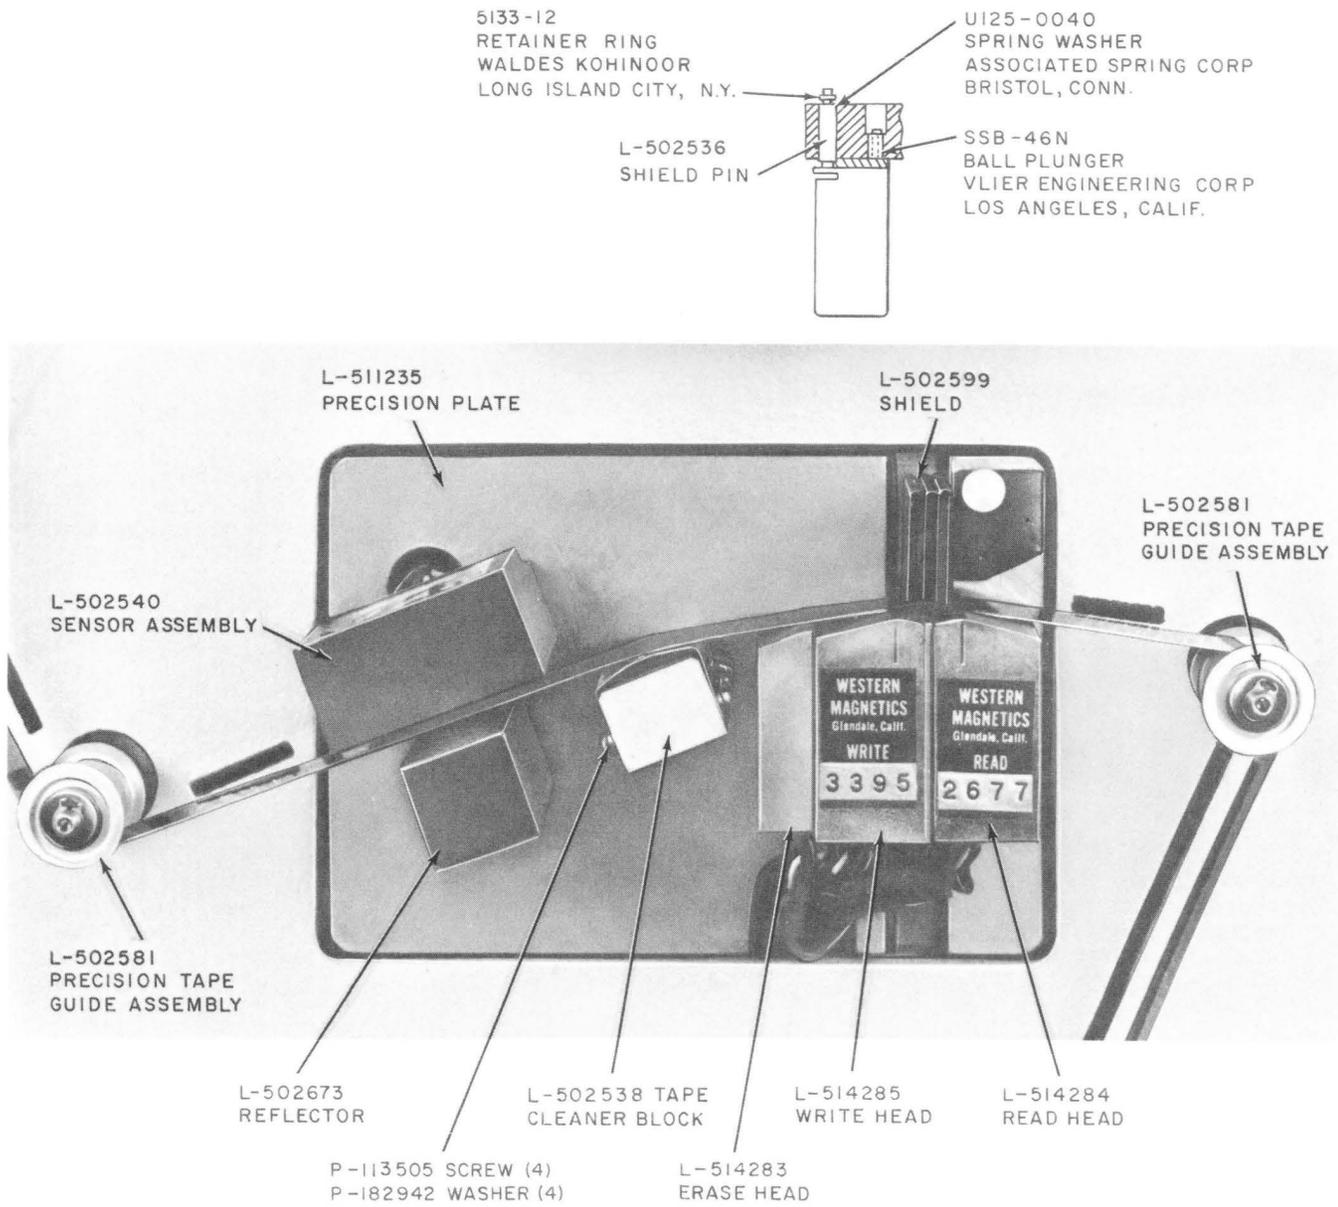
Partial Front View of KS-20571 L3 Tape Transport Showing Tape Path Components
